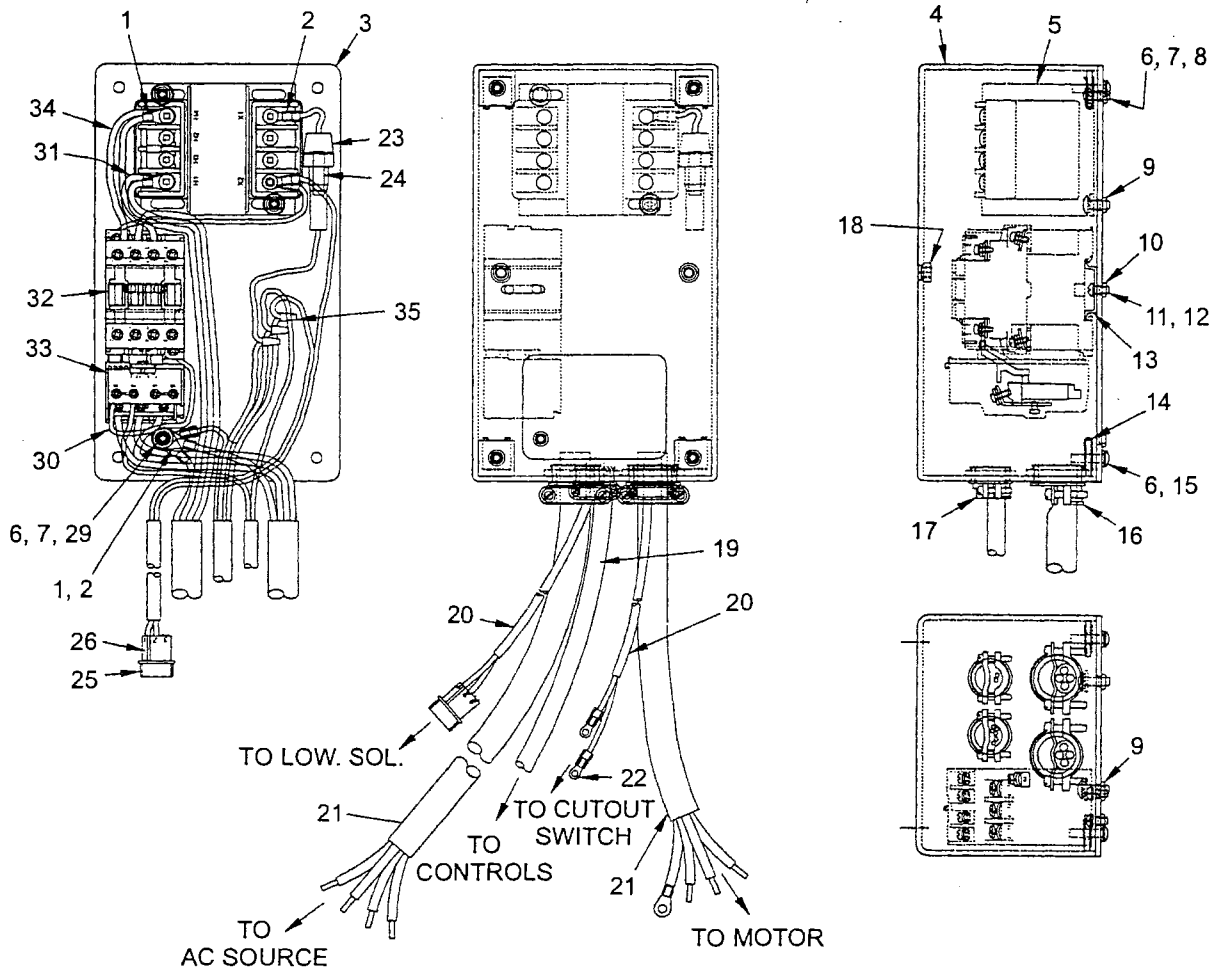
Electrical Box Assembly (36/48/60" Tables)
